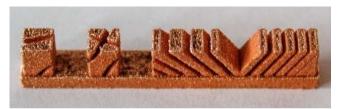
Print of a preliminary test sample for investigation of the geometric limits of the printing process
